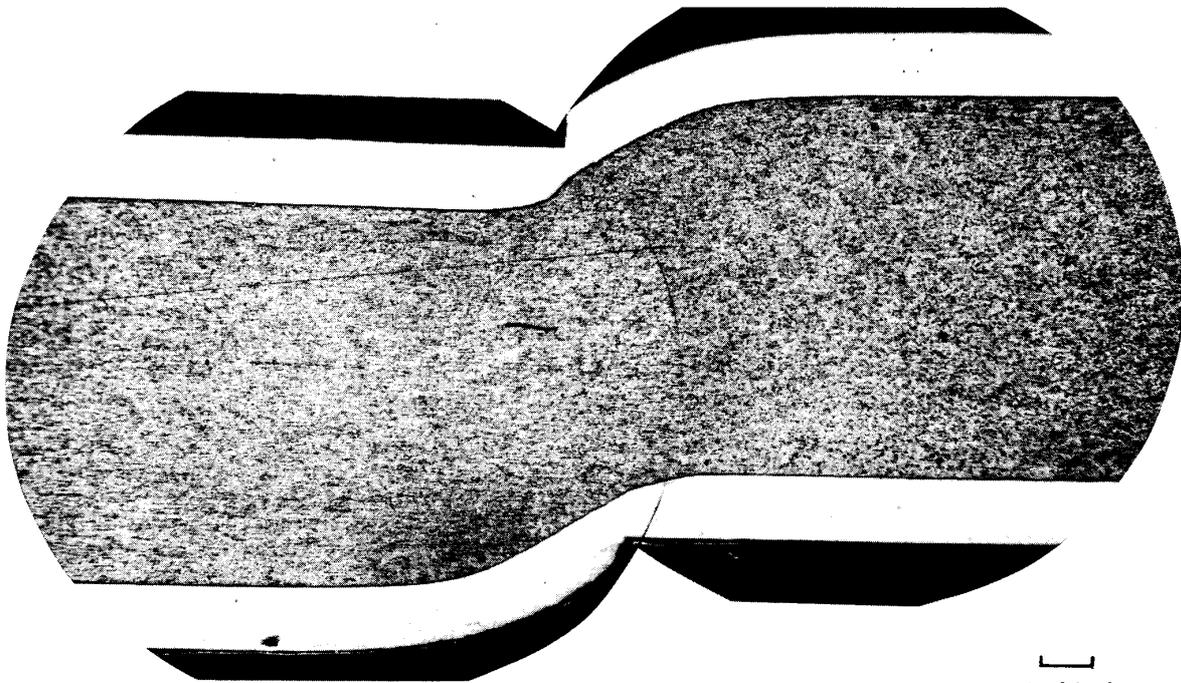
Al-clad SS Half-Way Specimen Section
